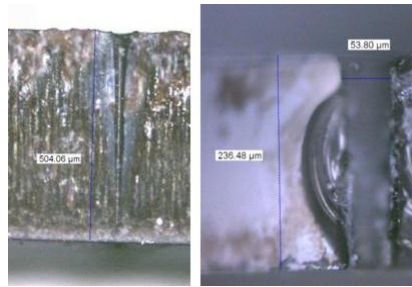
Drilled holes in lithium niobate. Left: A conical hole is obtained when the plate is drilled from one side only. Here the result of a $500\mu\text{m}$ thick plate is shown. Right: When the plate is flipped over, exactly replaced and drilled from both sides, the holes become cylindrical for a plate thickness of $250\mu\text{m}$ or smaller.
